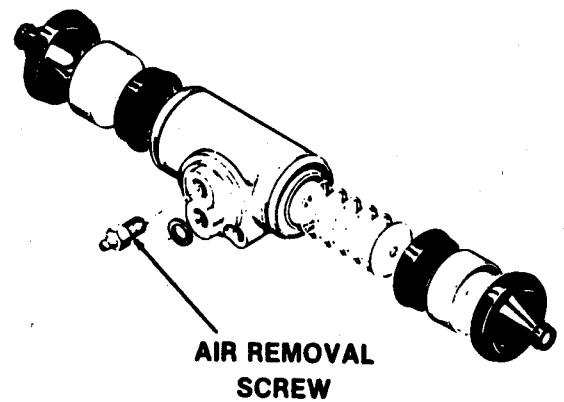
Wheel Cylinder on Front Axle (Rockwell Axle)
